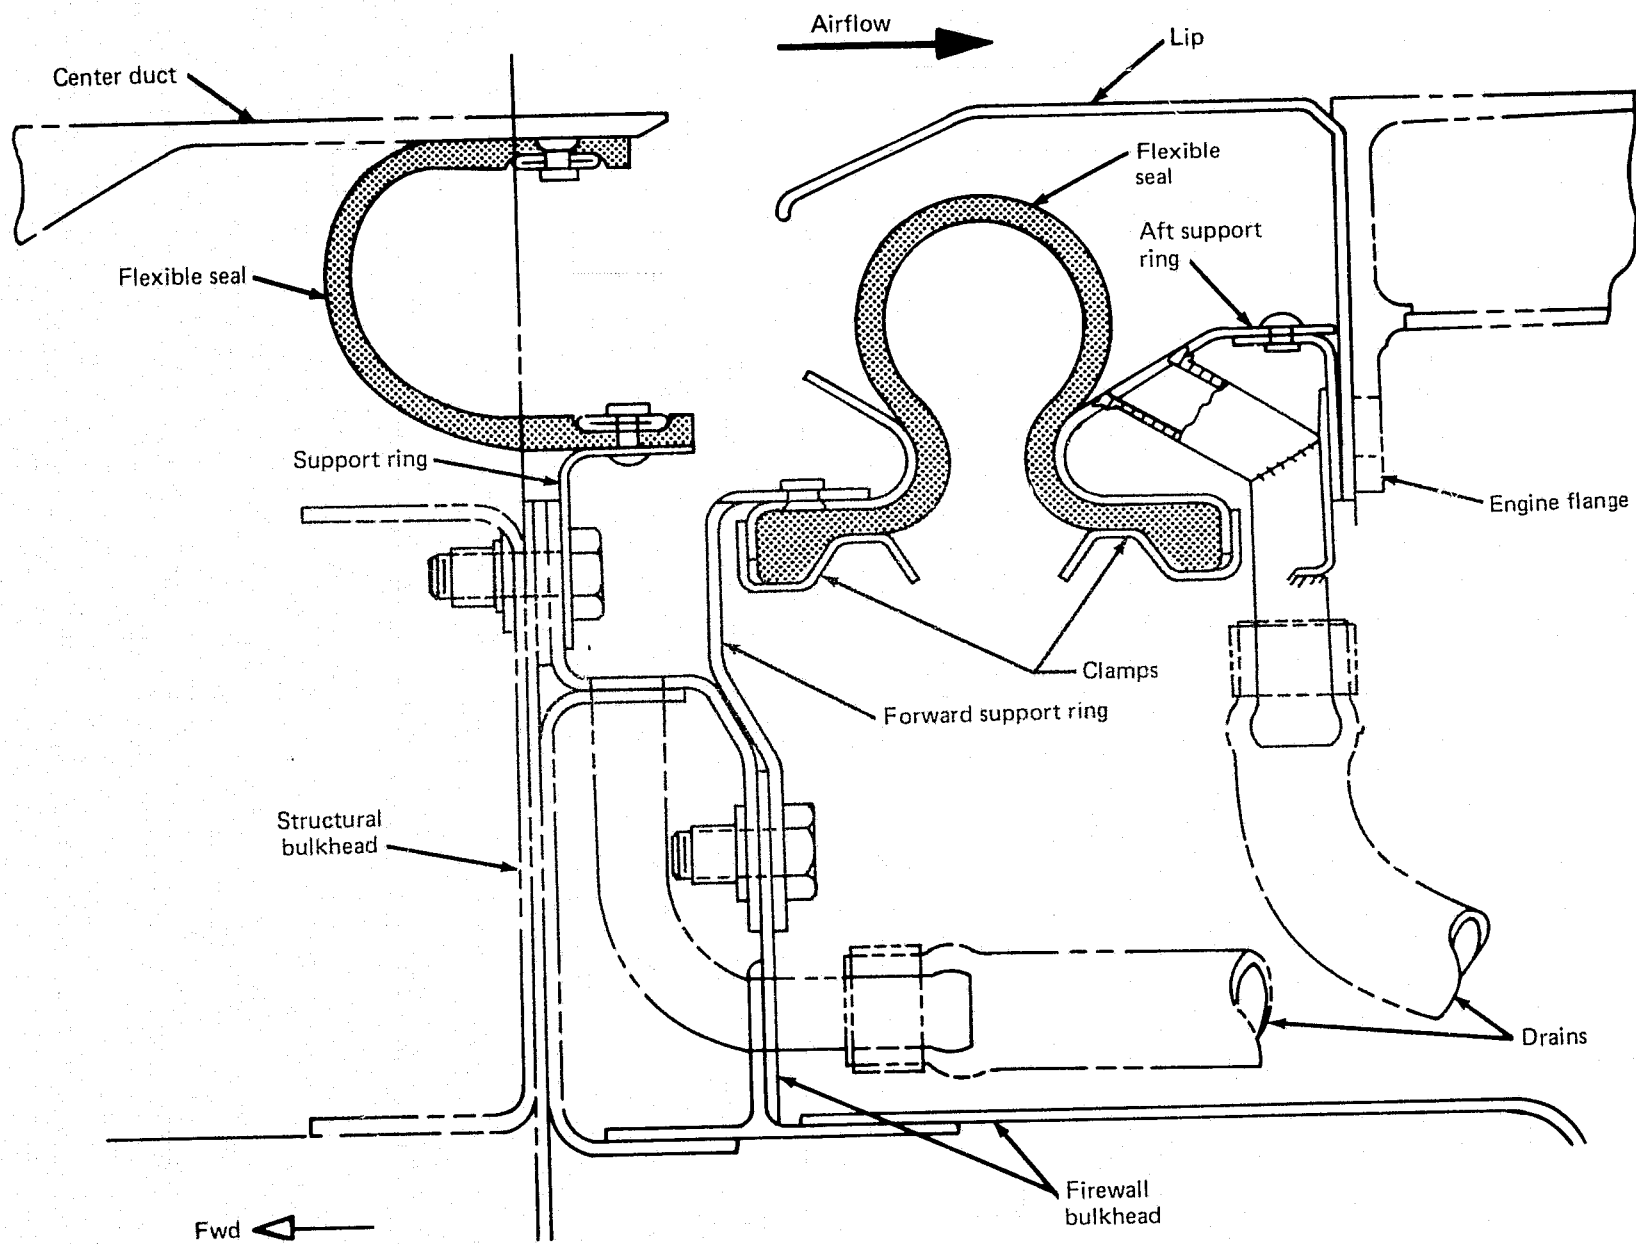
JT8D Refan Center-Engine Inlet-Duct Flexible Seal Assembly
